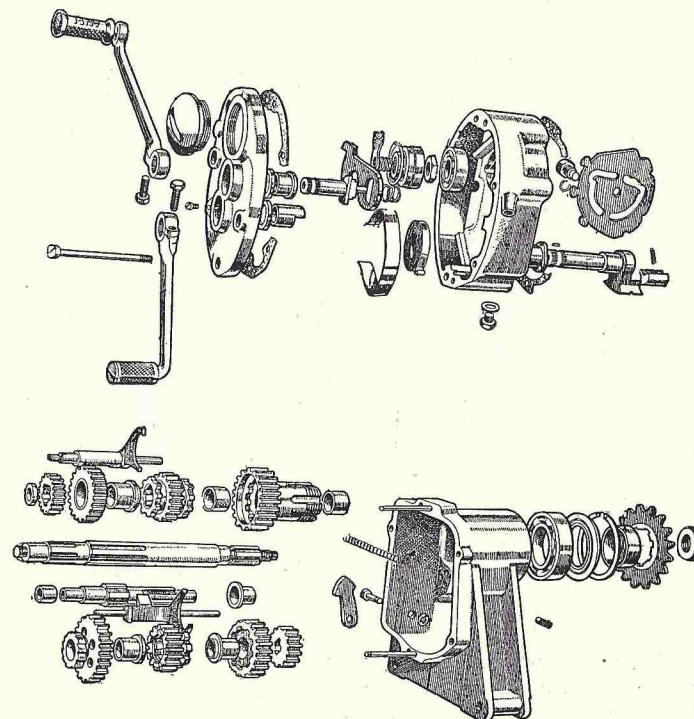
EXPLODED VIEW OF THE GB30 GEARBOX FITTED TO THE 200-C.C. MODEL LH COLT.
